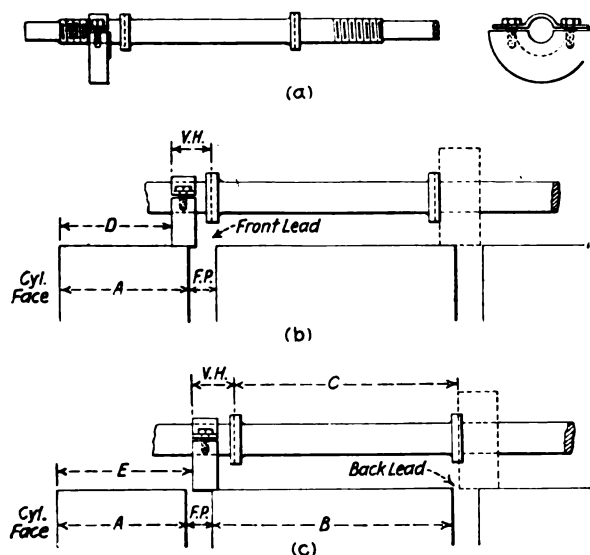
Dummy valve head and its front and back dead center positions when setting piston valves
